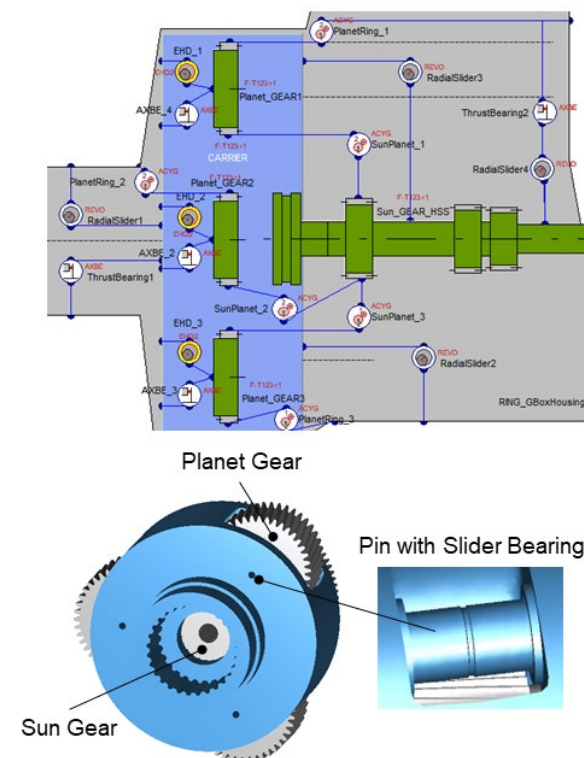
MBS/EHD setup in 2D view (top) and three-dimensional model without housing and ring gear (bottom)
